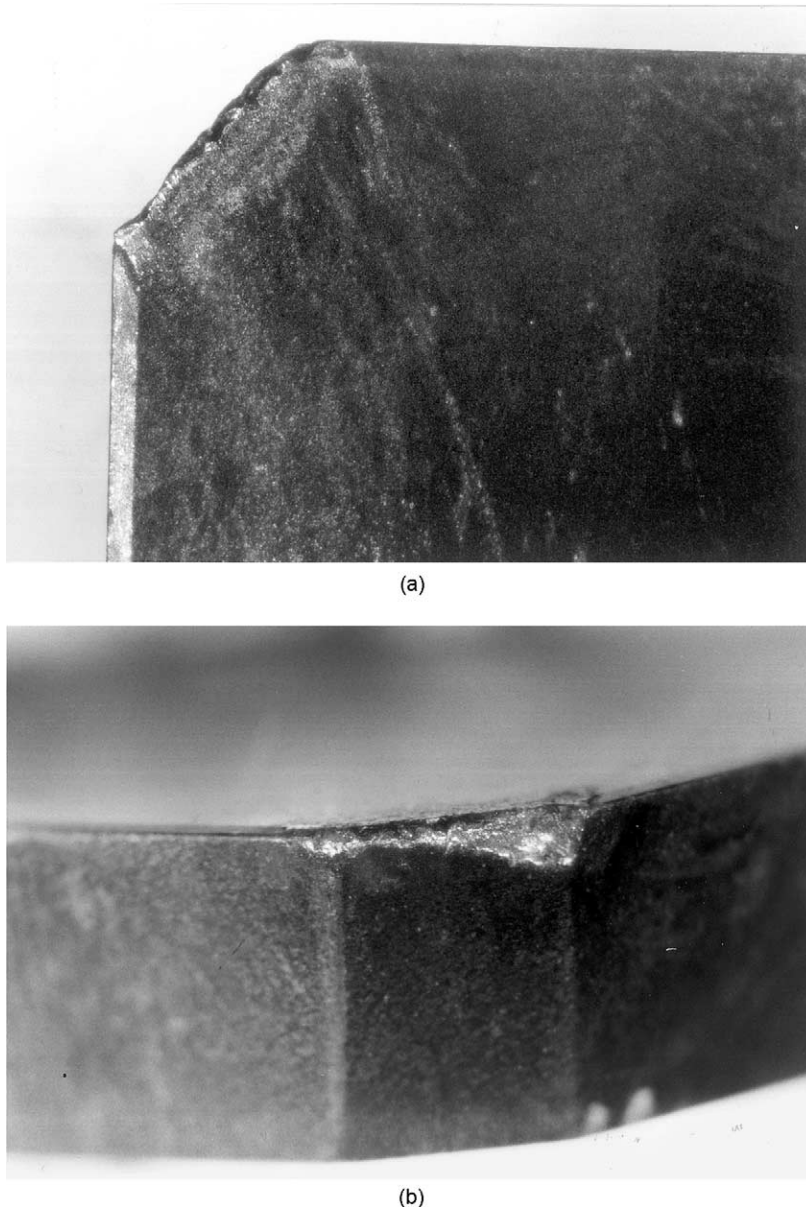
Typical tool chipping in the face milling of stainless steel: (a) rake face; (b) side face.
